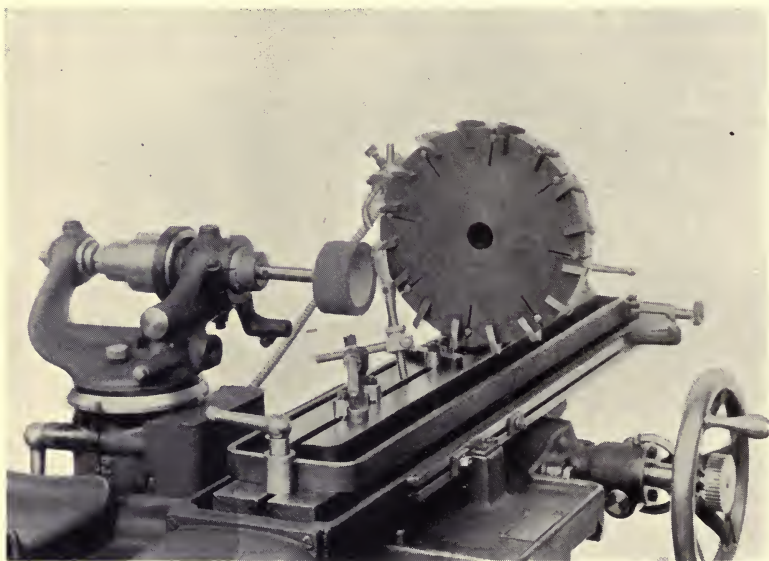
HERBERT CUTTER GRINDER. USE OF CUP WHEEL
